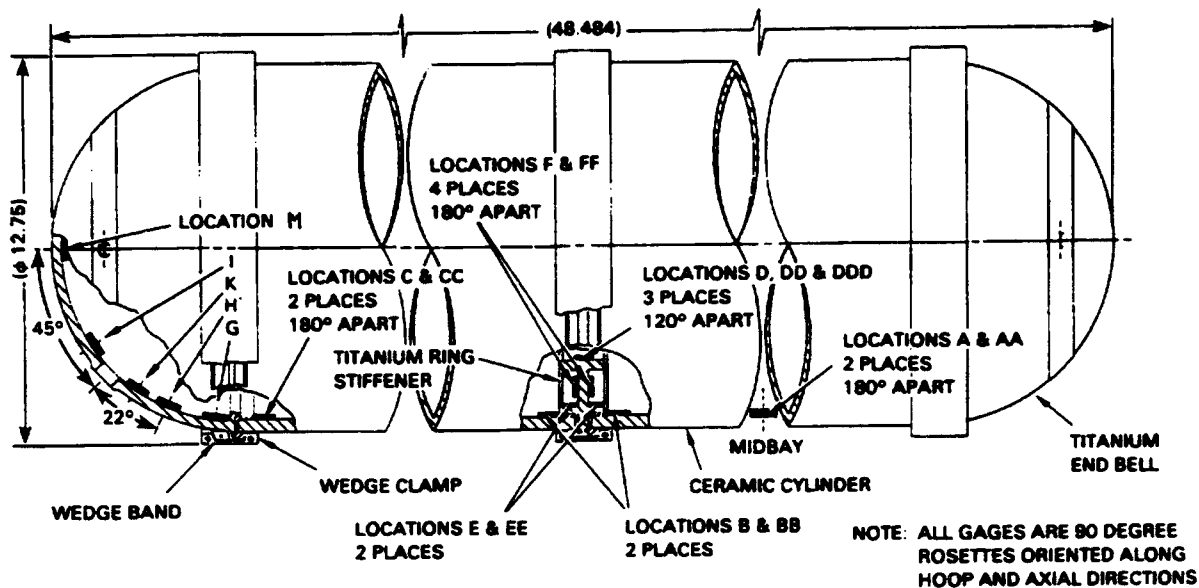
Wedge clamp for coupling cylinder assemblies and bulkheads in housing test assemblies.
